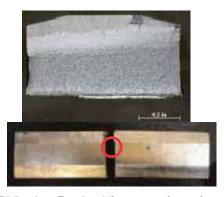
Titanium Bearing. The upper photo shows the cross-section of the fractured surface. Note the major slag entrapment flaw on the test surface. It was identified as the fatigue failure source. The lower photo shows another slag entrapment flaw that did not cause a fatigue failure.
